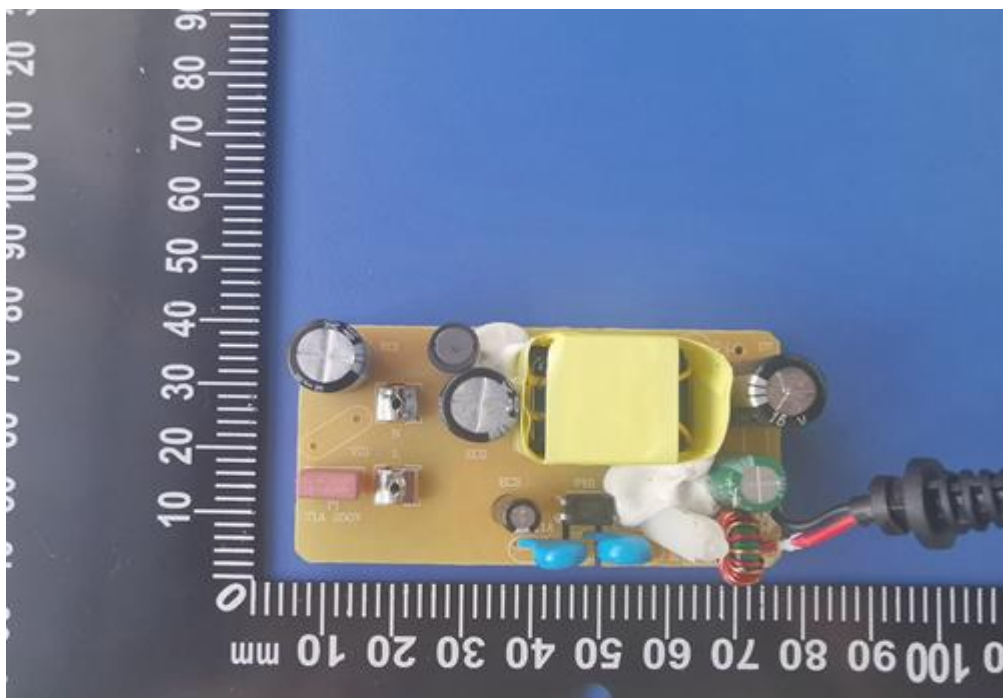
PCB top side view for model IVPxxxx-yyyyD (without D7, with LF1)
